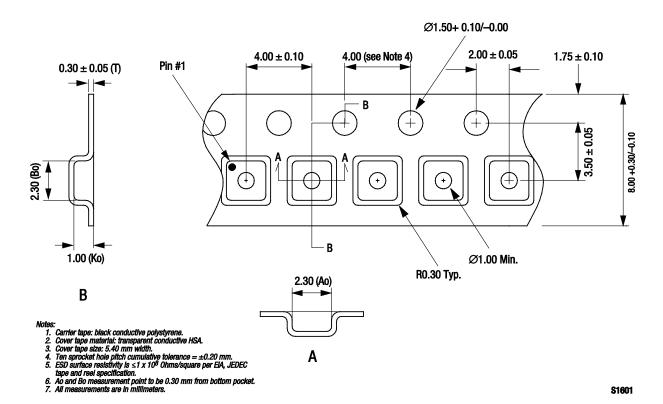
SKY13395-397LF Tape and Reel Dimensions
